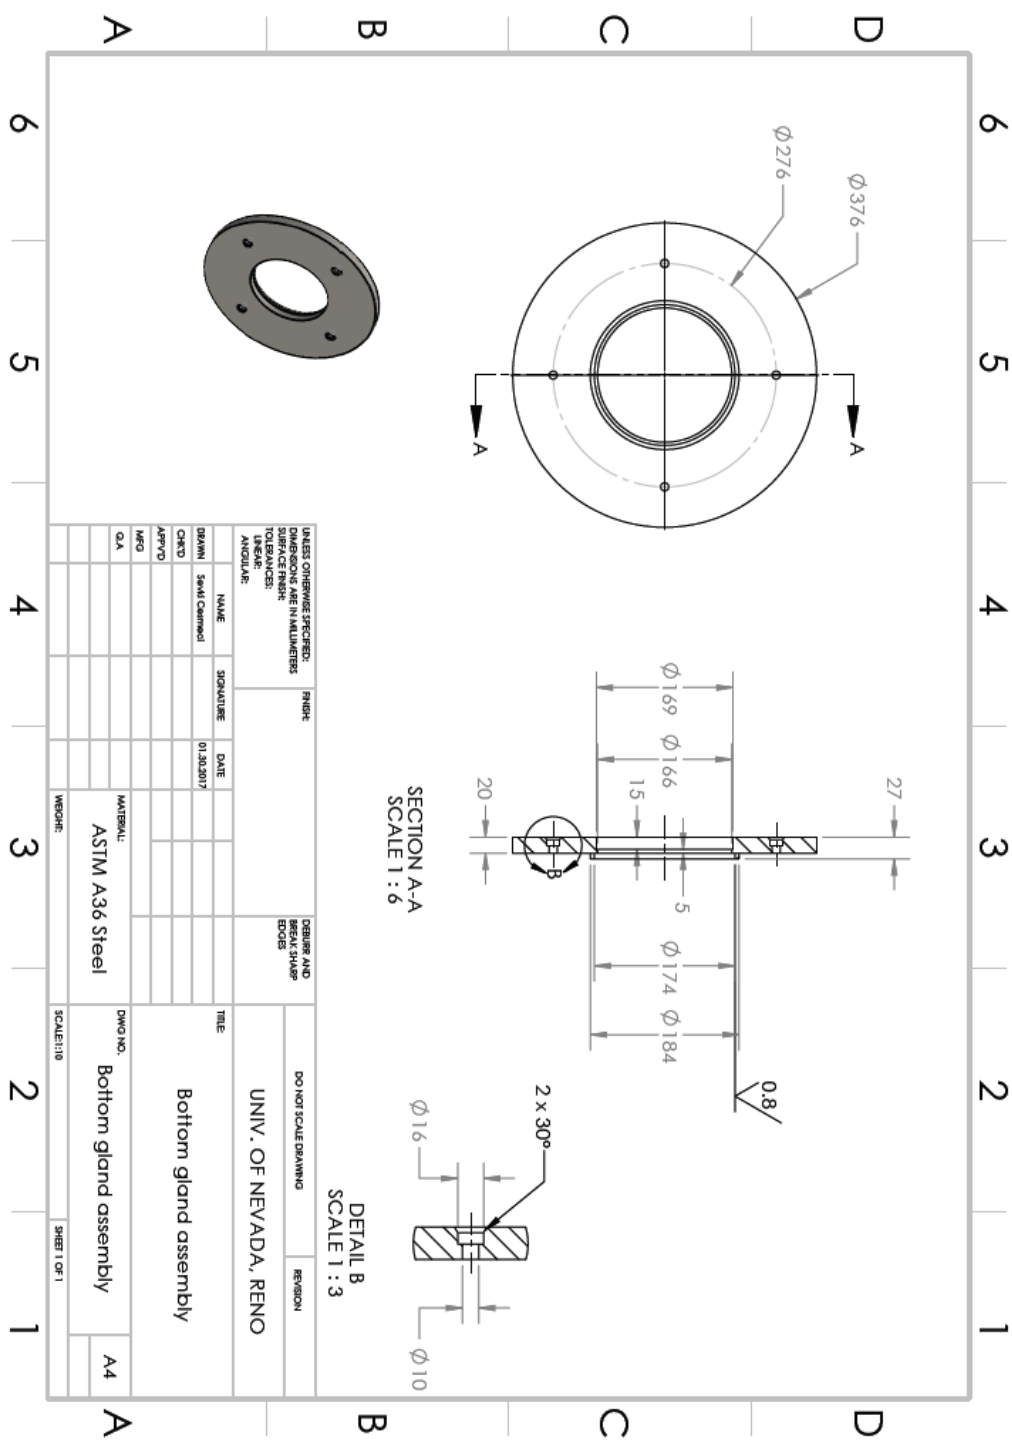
2D technical drawing for the bottom seal bottom gland assembly.
